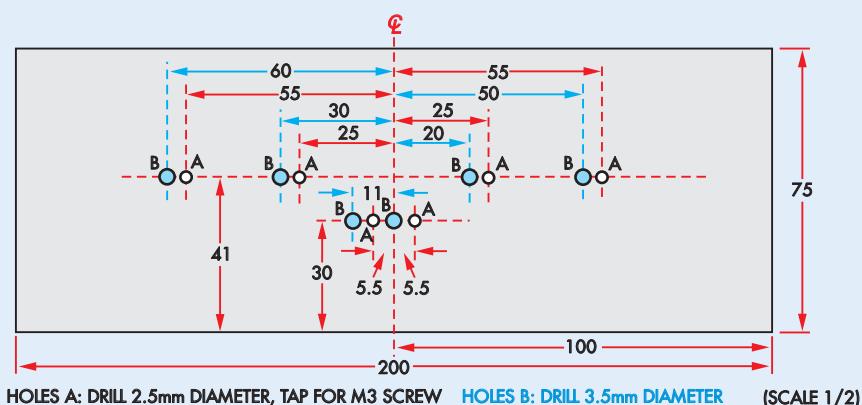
this half-size diagram shows the drilling details for the heatsink. For tapped holes, mark out and drill the white holes marked 'A' to a depth of 7mm (2.5mm drill, M3 tap). Alternatively, if you intend drilling right through the heatsink, drill the blue holes marked 'B' (3.5mm drill).
